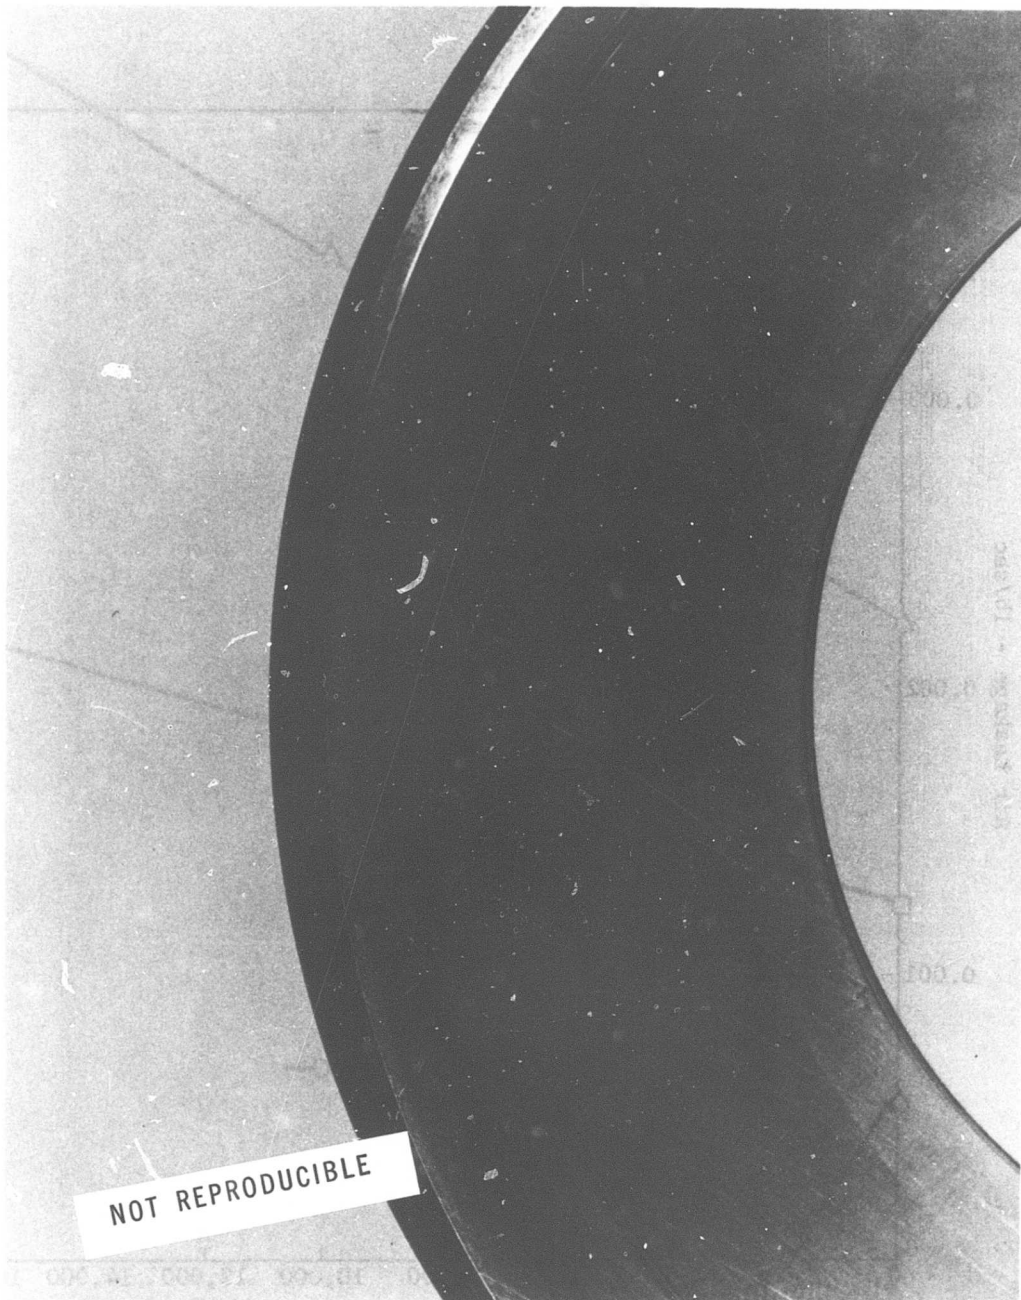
Carbon-Face Seal Rotating Component After Testing.
